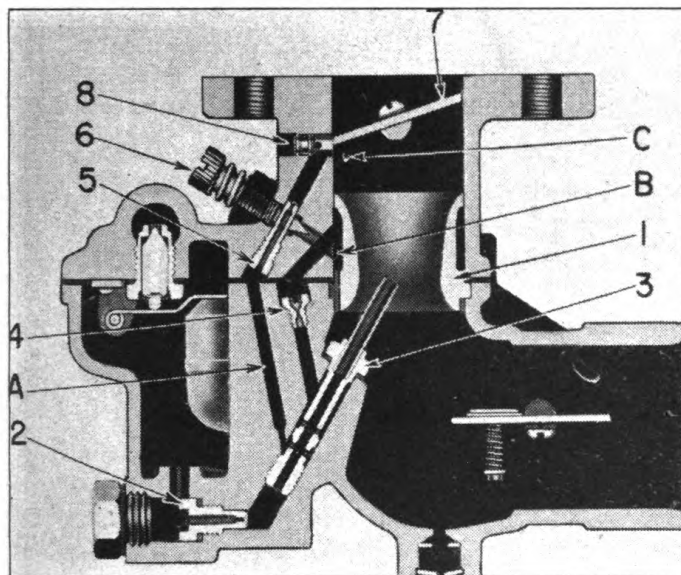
Sectional View of Zenith Carburetor Used on "SI" Tractor
